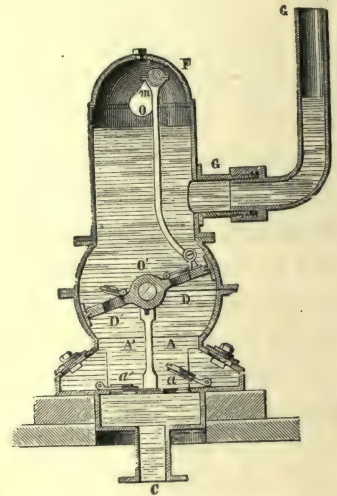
Bramah's oscillating pump.—C, *a*, *a'*, suction tube and valves.—A, A', spaces separated by a partition.—DD', piston oscillating round the axis O'.—Om, handle giving movement to the piston.
